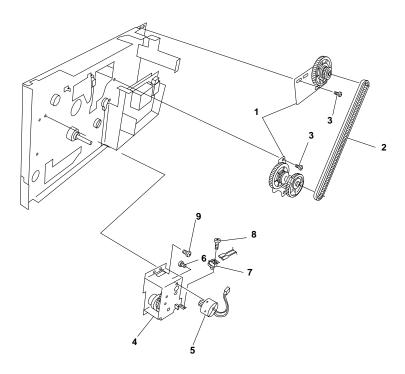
Drive Unit D Motor, Drive Unit E, and Drive Unit E Belt Parts Locational Diagram
